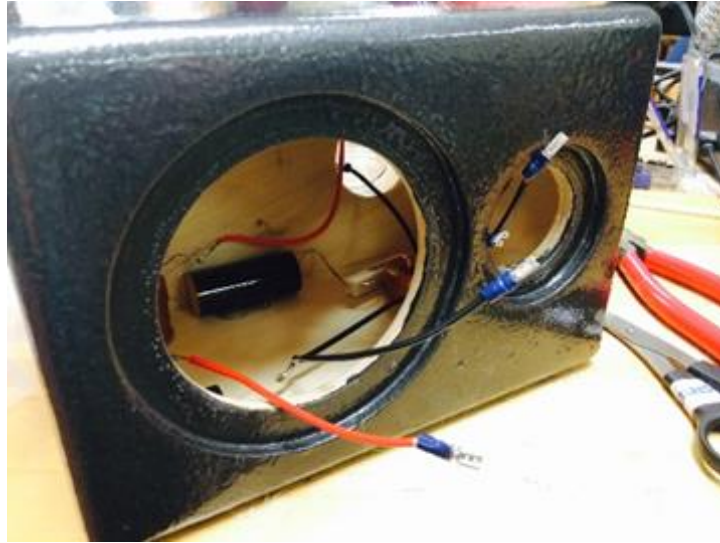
Photograph of the finished enclosure for the loudspeaker, showing internal wiring for the passive crossover and L-Pad.
